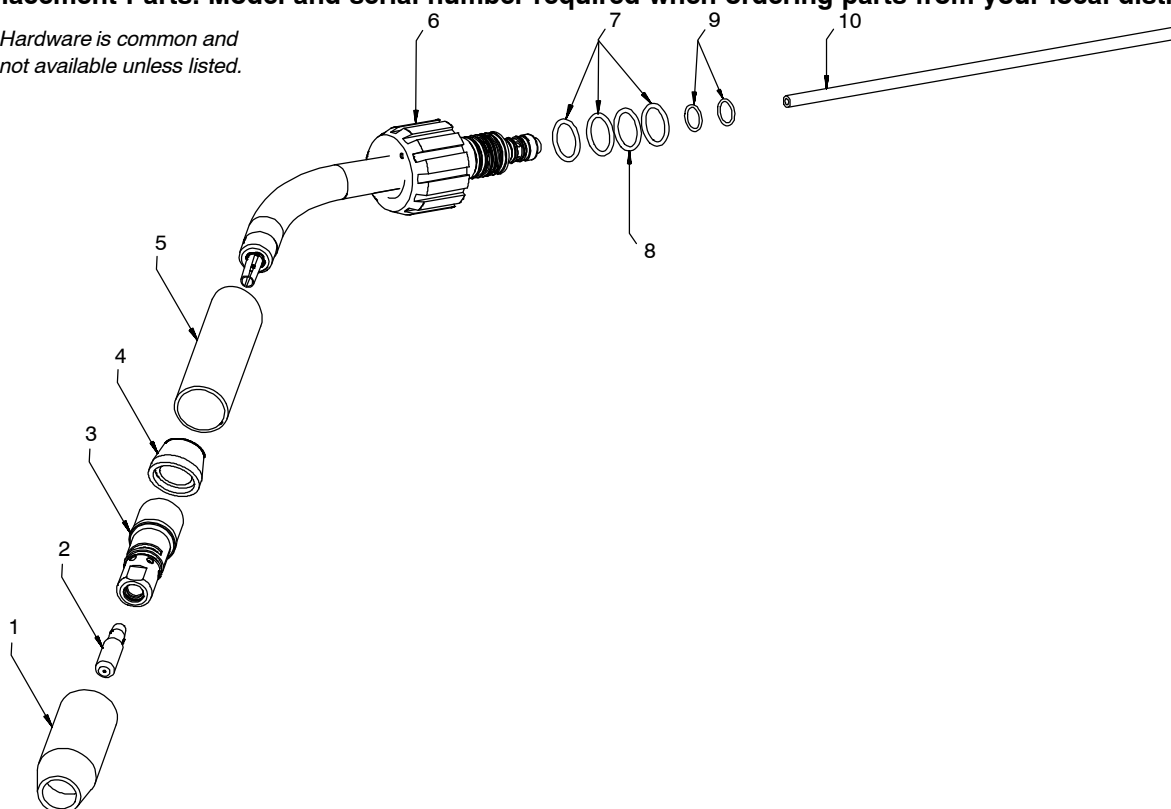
Exploded View Of XR-Aluma-Pro Gun (Continued)
